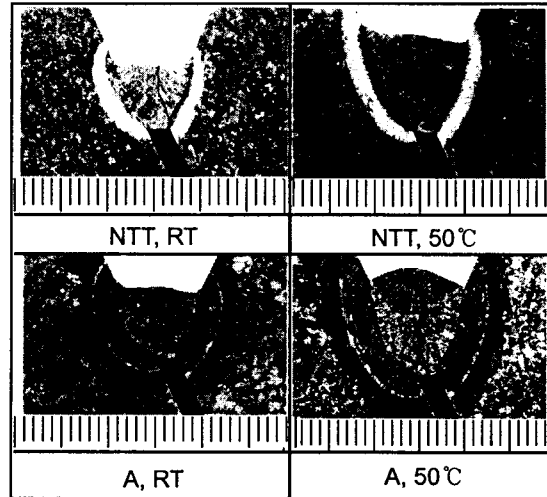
Crack appearance in y-groove weld cracking test
